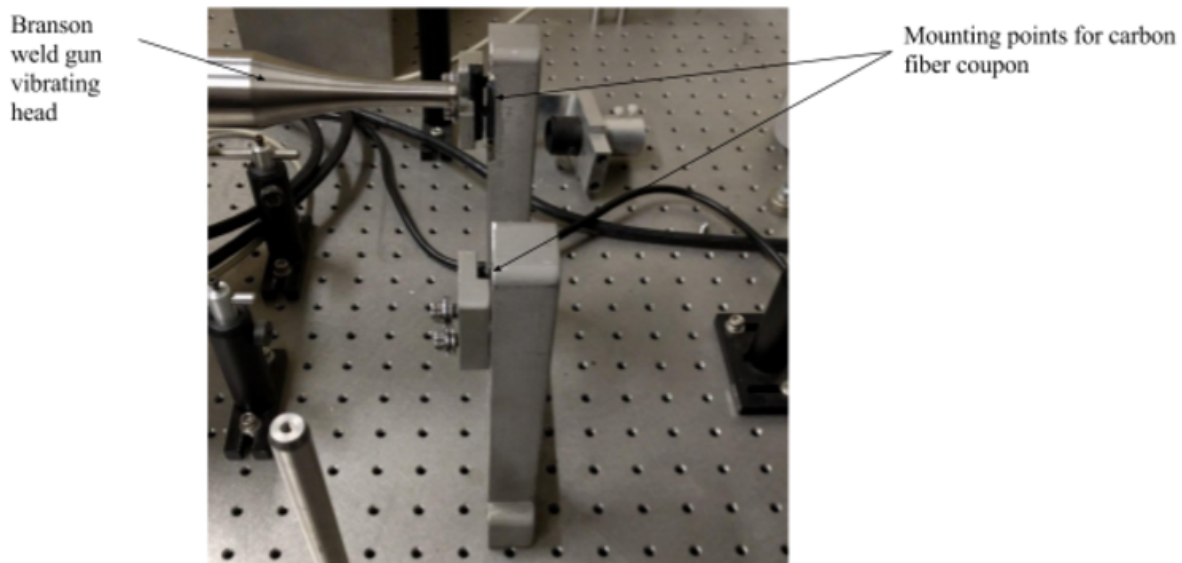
Dr. Chen's current fixture setup (side view) using 1" thick stainless steel uprights for holding the test pieces.
